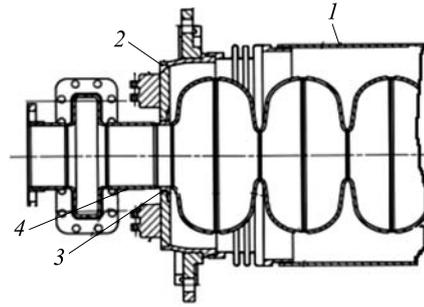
Scheme of combined adapter connection with a cryogenic module: 1 — steel shell; 2 — electron beam welding or argon arc welding connection of shell with steel flange of adapter; 3 — steel flange; 4 — niobium tube
